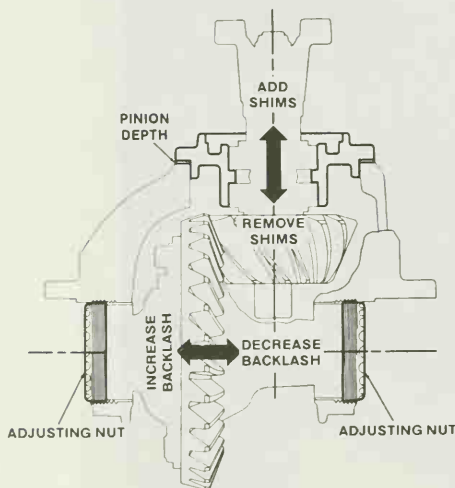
Side adjusters are used to set backlash on a removable carrier. (Ford Motor Company)
